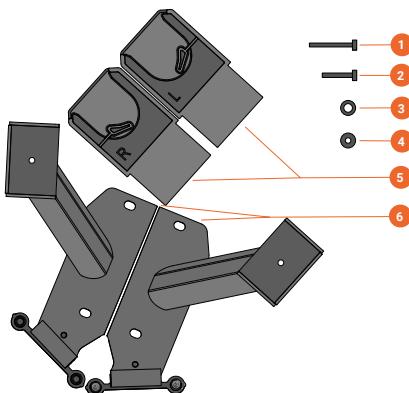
Lovens Explorer Maxi Cosi adapter set parts.
